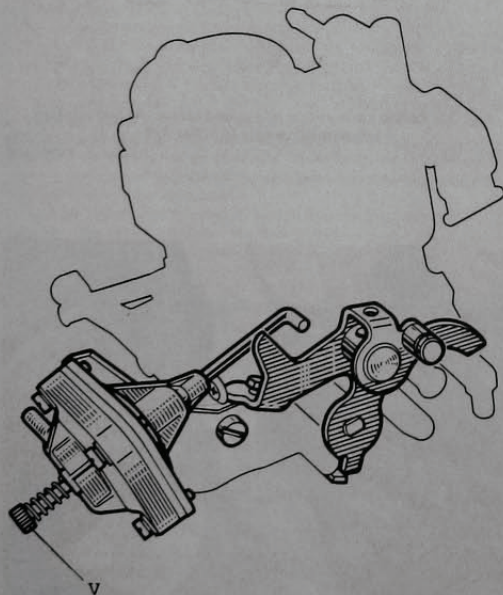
Solex carburettor anti-stall device adjustment screw (V) (Sec 15)
